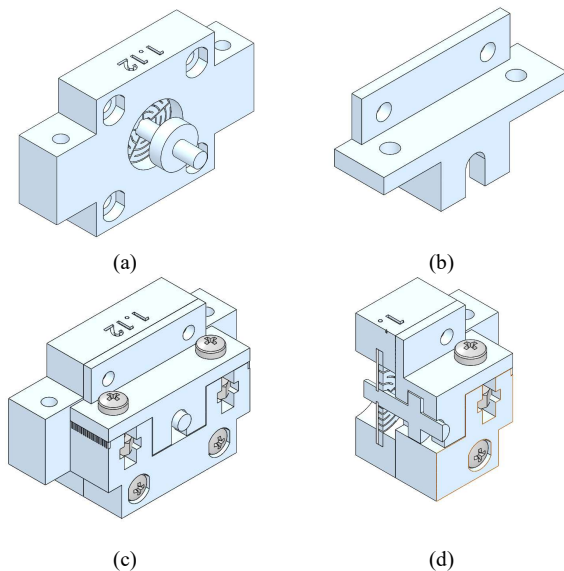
(a) prototype, (b) additional pretension part (c) prototype mounted onto pretension parts (d) cross-section pretension part mounted onto prototype
